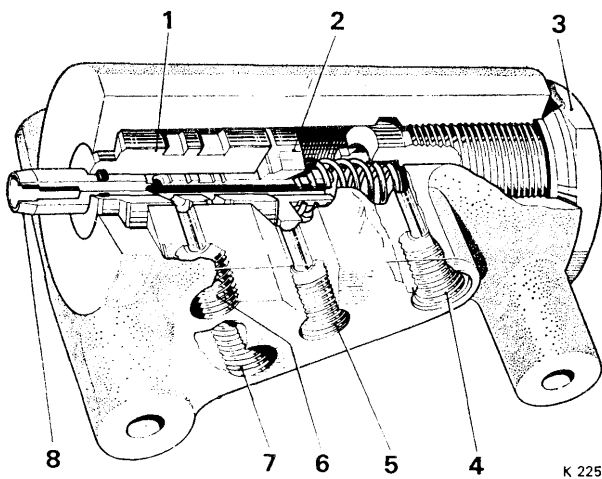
CUT-AWAY VIEW—BRAKE DISTRIBUTION VALVE
